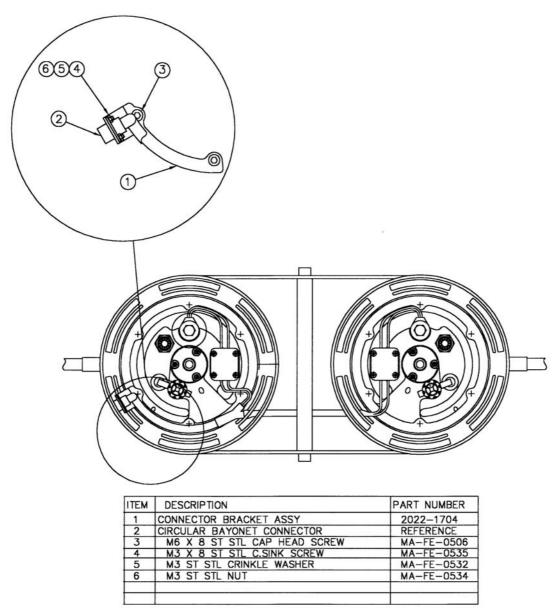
CONNECTOR BRACKET ASSEMBLY
